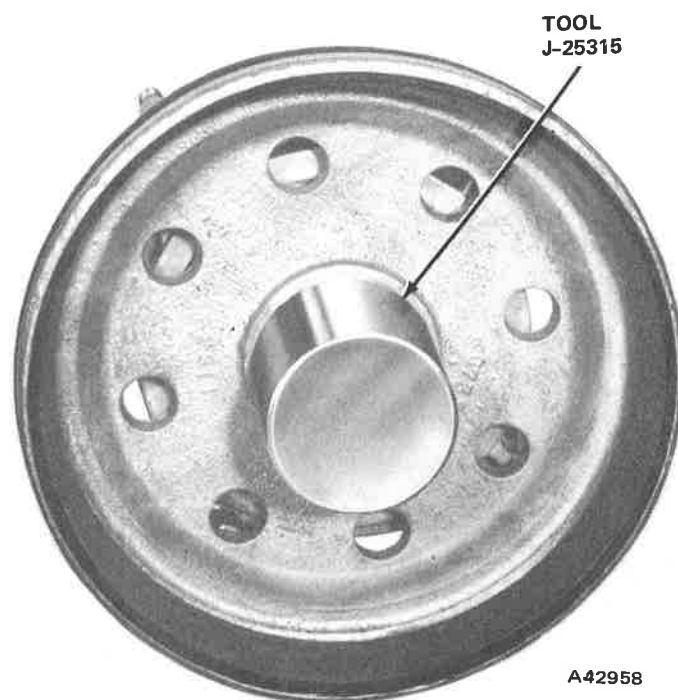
Installing Clutch Hub in Thrust Bearing and Cover
